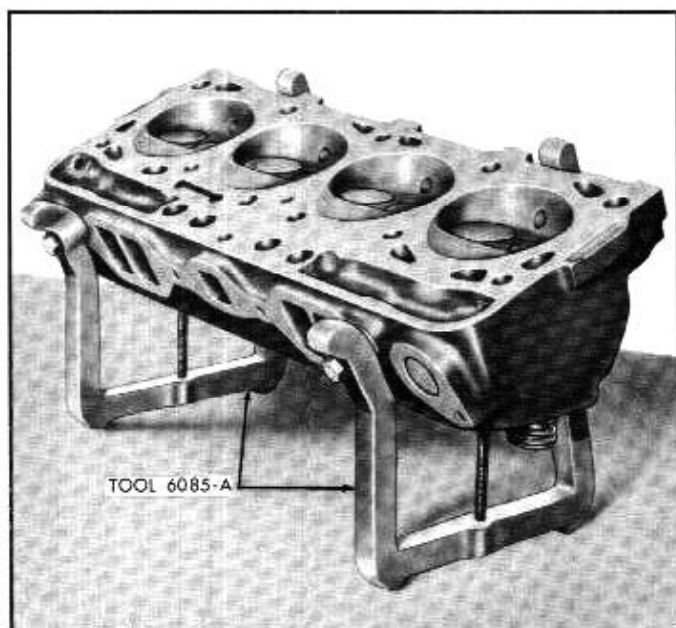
C-57—Cylinder Head Positioned for Carbon Removal
